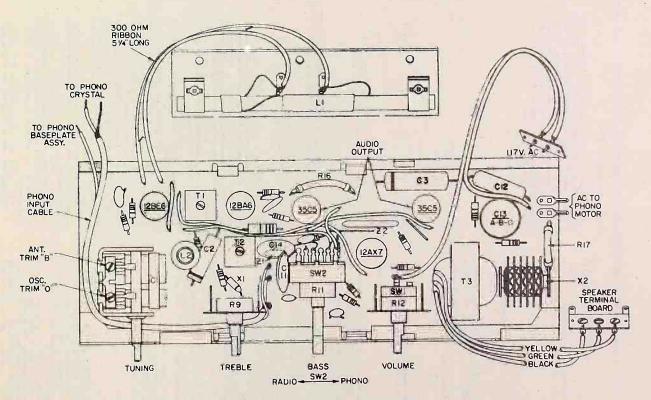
TOP VIEW OF V-2503-1 CHASSIS
